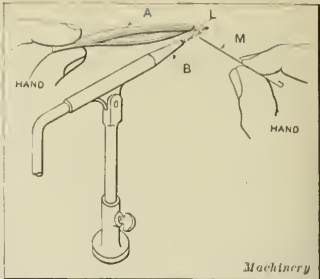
Welding Tungsten and Platinum Wires
